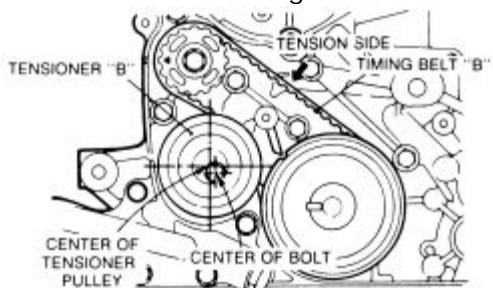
Correct installation of tensioner B for the silent shaft belt-the center of the pulley is
